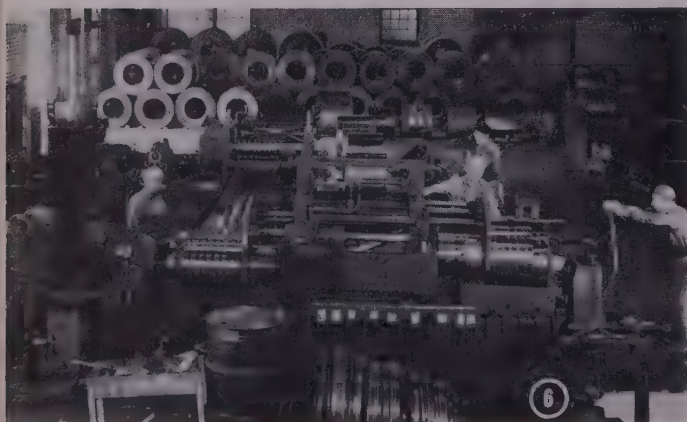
Sheet mill installation of single slitter with double swiveling uncoilers and recoilers. While one coil is slit (left) the previously slit stock of coils is removed from drum (right). Next, the double uncoiler and recoiler will be revolved 180 degrees, bringing the newly-loaded uncoiler and empty recoiler drums into line with slitter, starting another cycle
